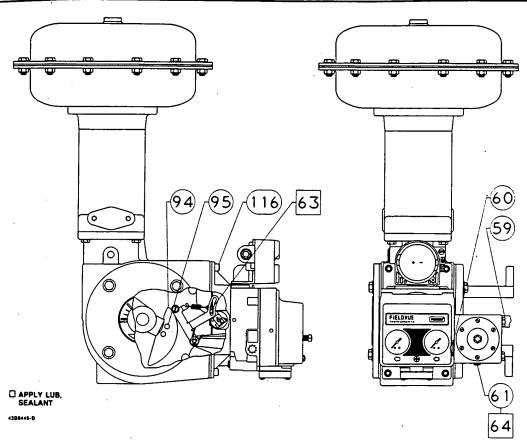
Type DVC5020 Series Digital Valve Controller Mounted on Type 1051 Size 40 Actuator with Integrally Mounted Filter Regulator
